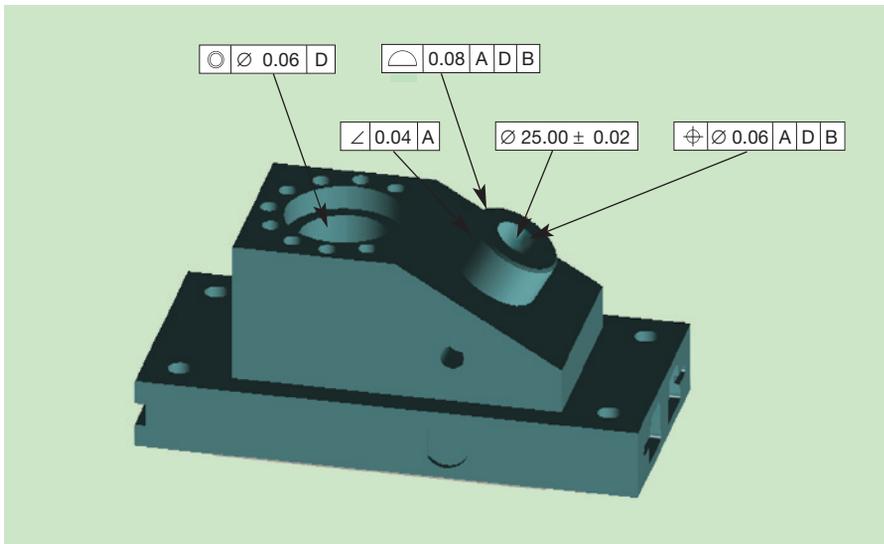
Workpiece and tolerances used in case study discussed in Section 9.1.1.
